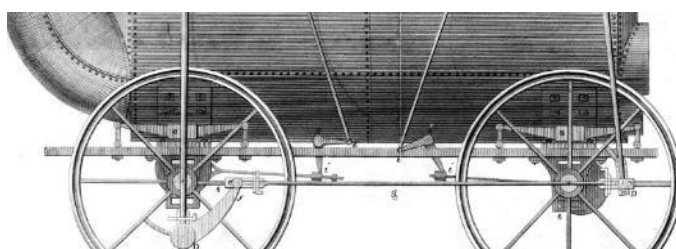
Early form of plate springs and frame arrangement adopted on the Killingworth-type locomotives.
